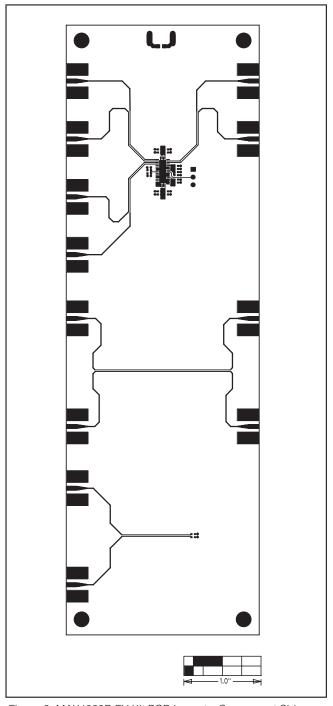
MAX4889B EV Kit PCB Layout—Component Side
